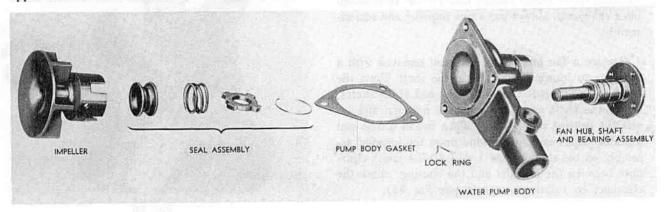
PARTS OF THE CHAMPION WATER PUMP
